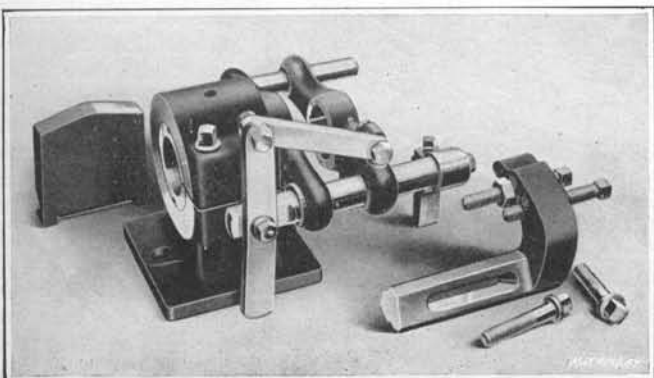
Details of Automatic Die Fixture shown in Fig. 27
